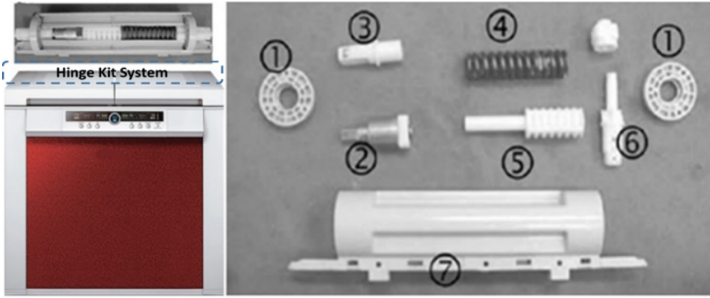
Domestic refrigerator and HKS parts: kit cover ①, oil damper ②, fixed cam ③, spring ④, cam ⑤, shaft ⑥, and HKS housing ⑦
